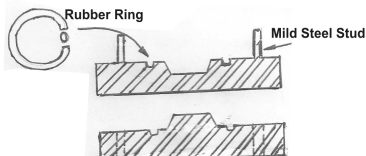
Cross-Sectional Views of Upper and Lower Parts of the Mould
